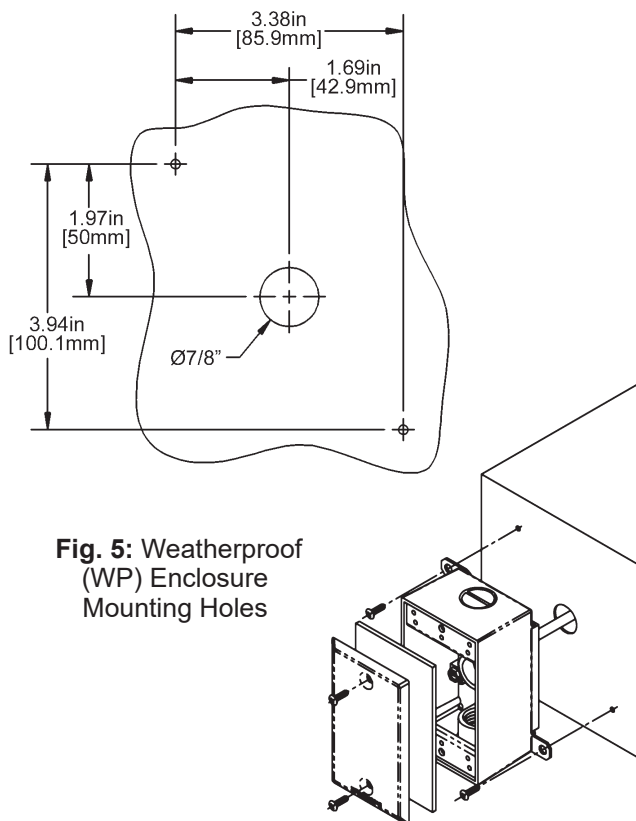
Weatherproof (WP) Enclosure Mounting Holes
